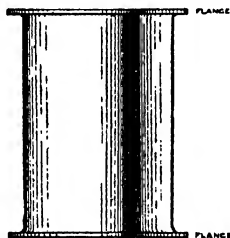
A section of a boiler flue. It is made of a plate, bent round and the two ends welded so that it forms a tube. Then the flanges are bent over.
